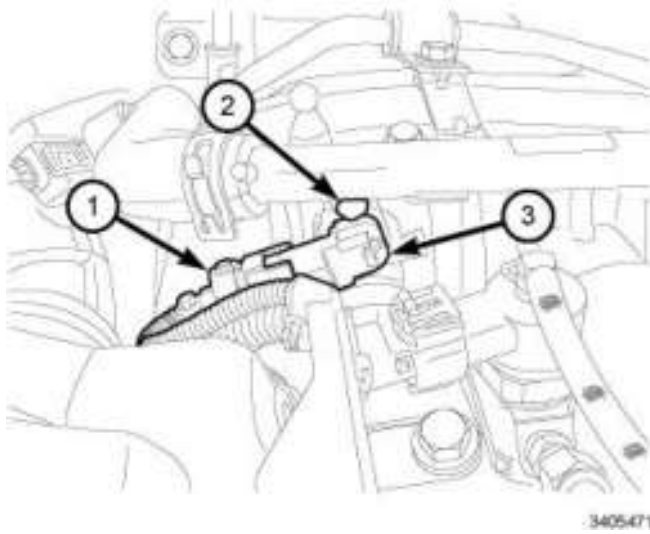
Camshaft Position Sensor, Connector & Bolt
